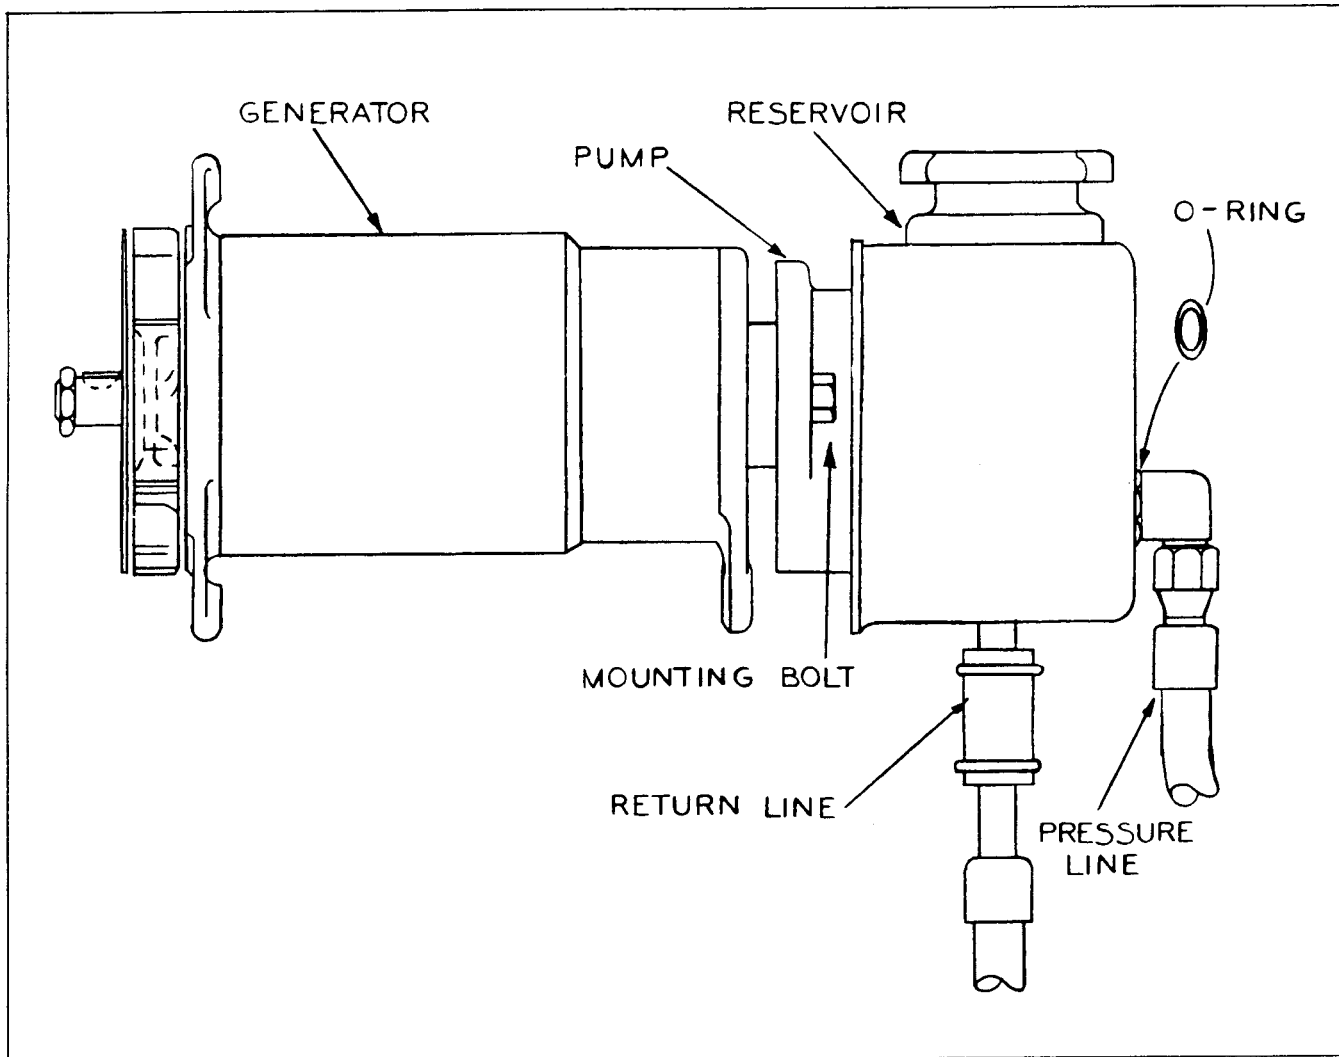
Typical Power Steering Pump (Machines So Equipped)
